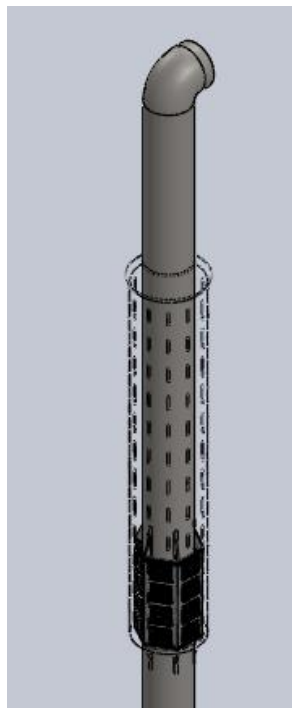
Wireframe Heat Shield View of Exhaust Stack and Heat Shield Assembly
